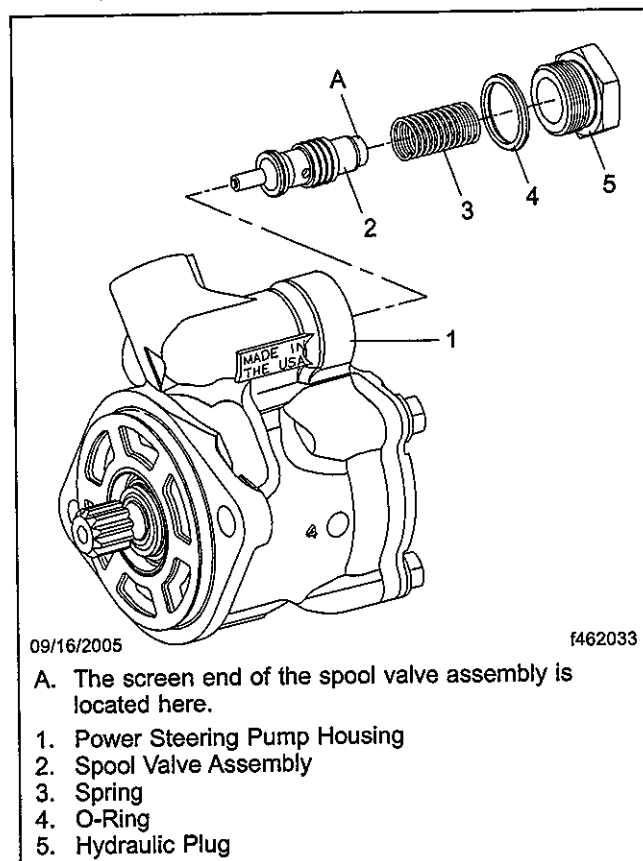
, Remove the Spool Valve Assembly (EV model shown)
